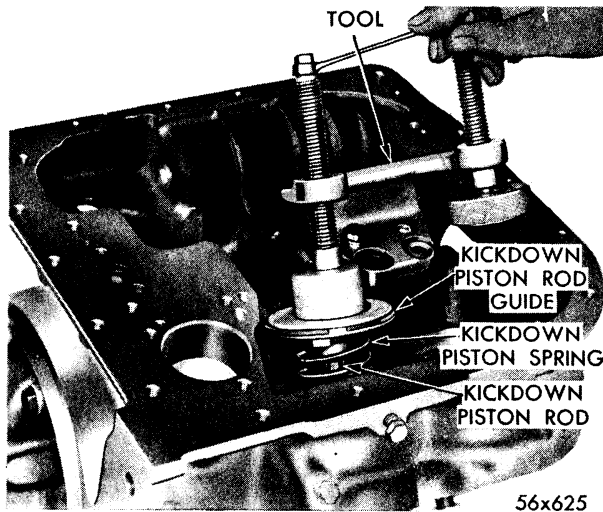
Removal and Installation of Kickdown Piston Rod Guide and Spring
